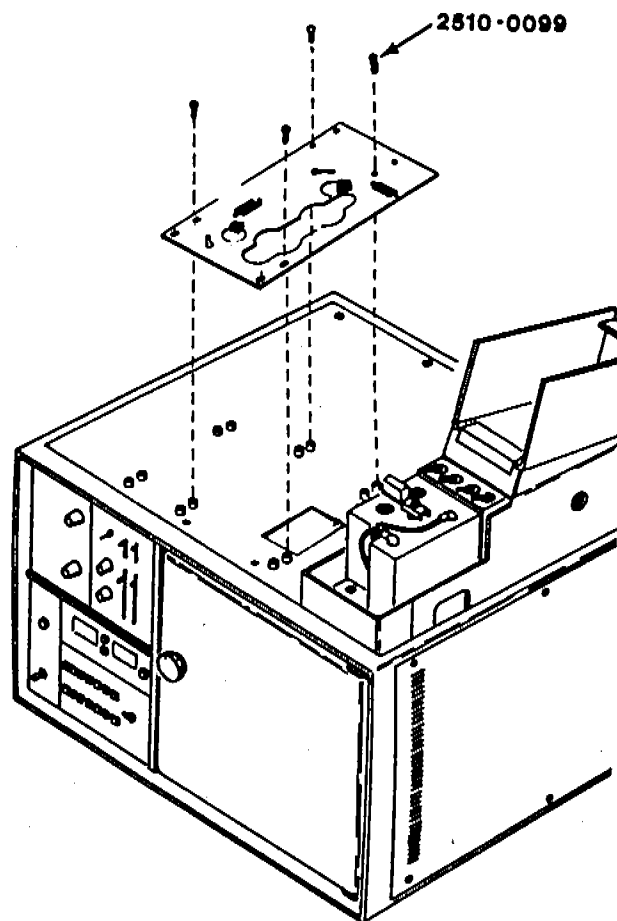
Injector Only Mounting (Packed Column Inlet)
